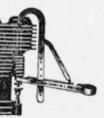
TERRY VALVE SPRING COMPRESSOR FOR S.V. ENGINES
